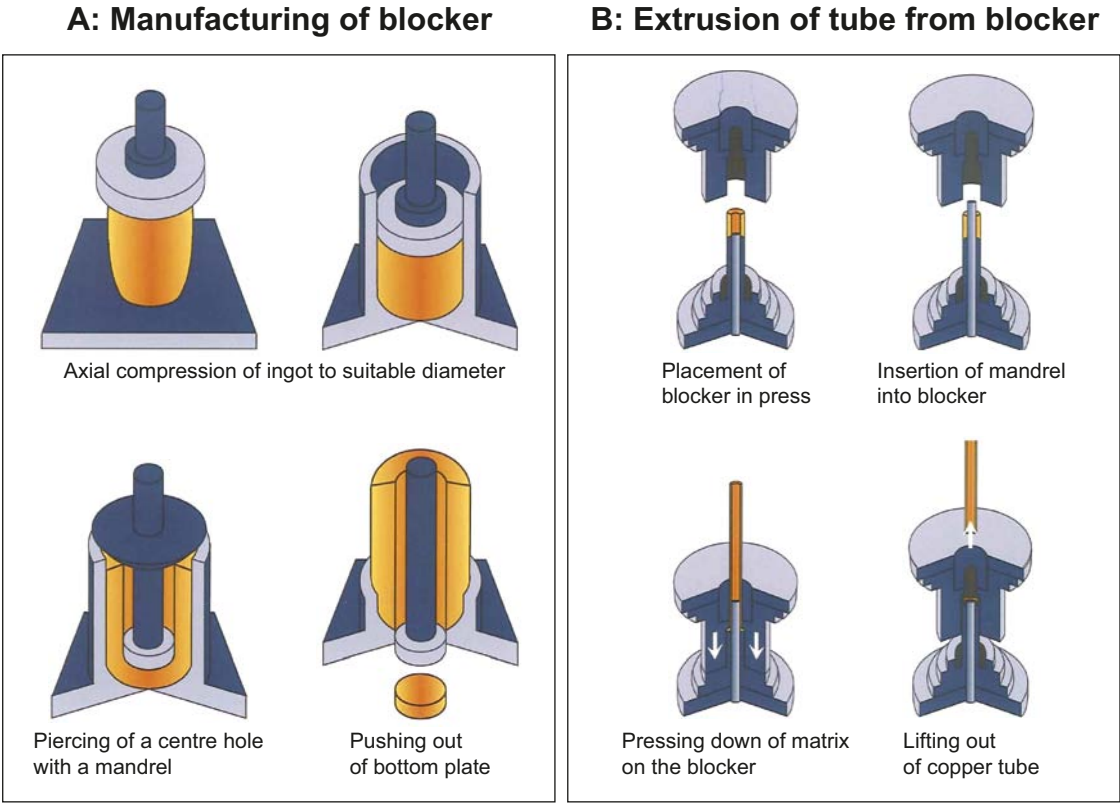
Schematic illustration of the extrusion process, including the manufacturing of a blocker and the extrusion of the tube.
